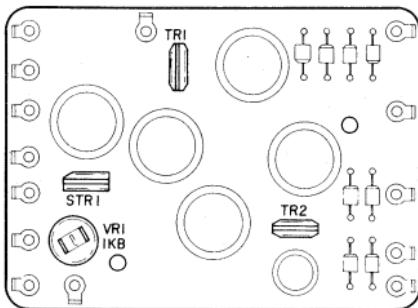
81-5044 POWER SUPPLY P.C. BOARD
